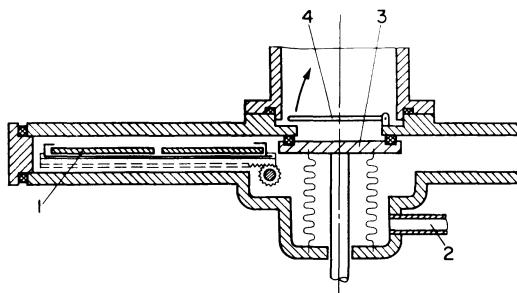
Vacuum lock with bellows-sealed plate valve
